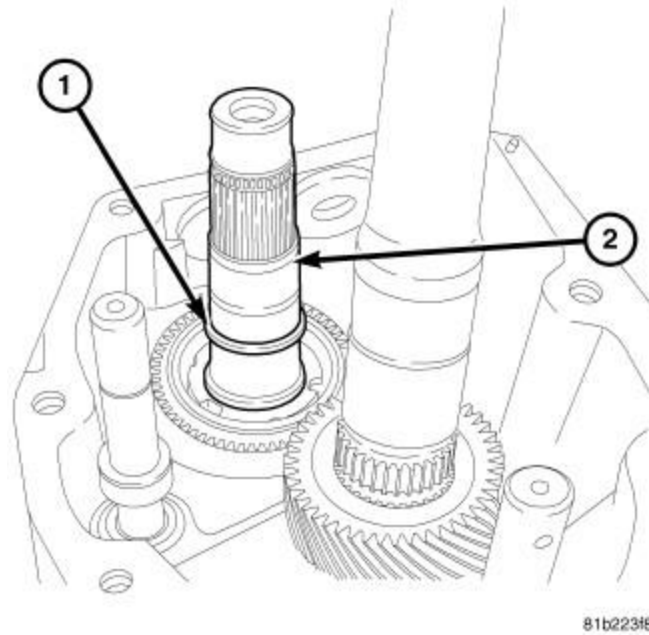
5th Gear Bearing Spacer & Countershaft
